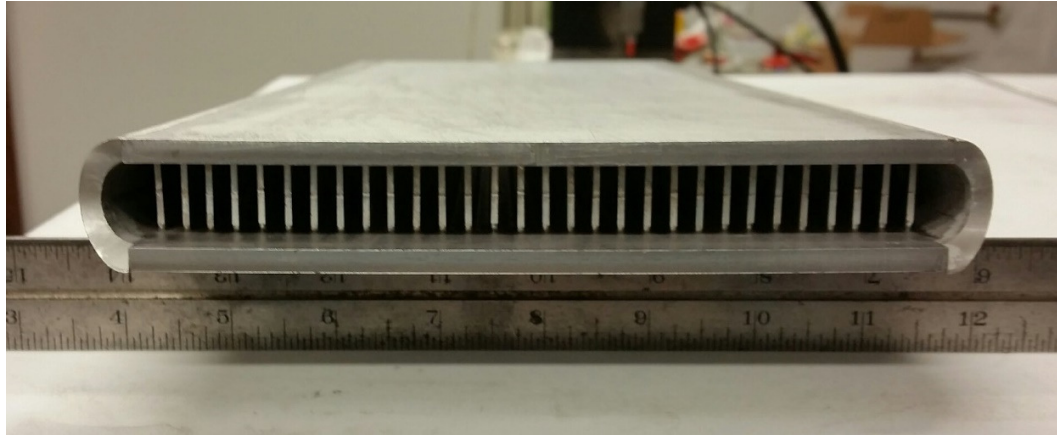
View of test section tube during fabrication illustrating rib channels
